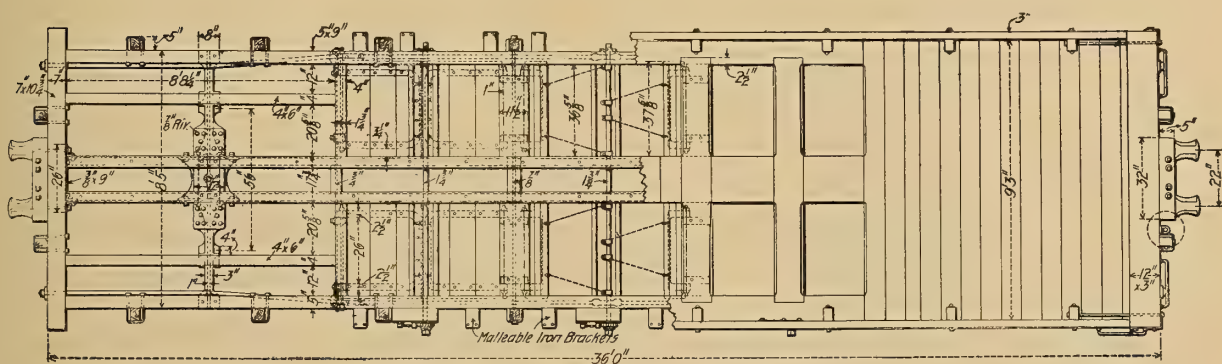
HALF FLOOR PLAN AND FRAMING.
